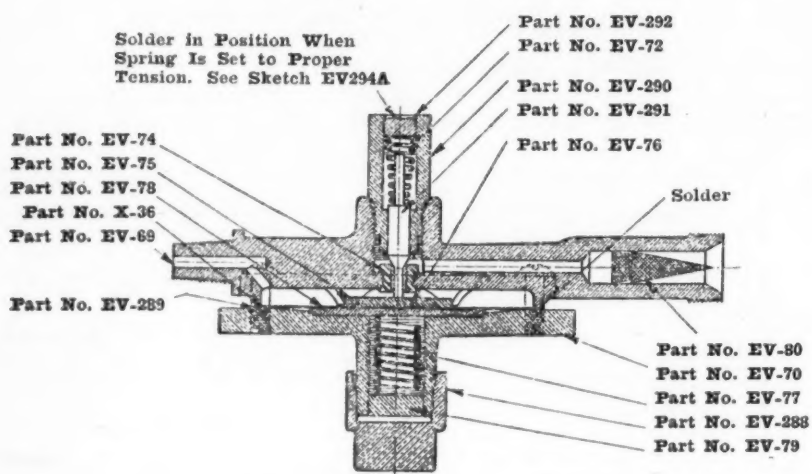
Expansion valve for the Socold system, showing parts number and method of soldering in position.
